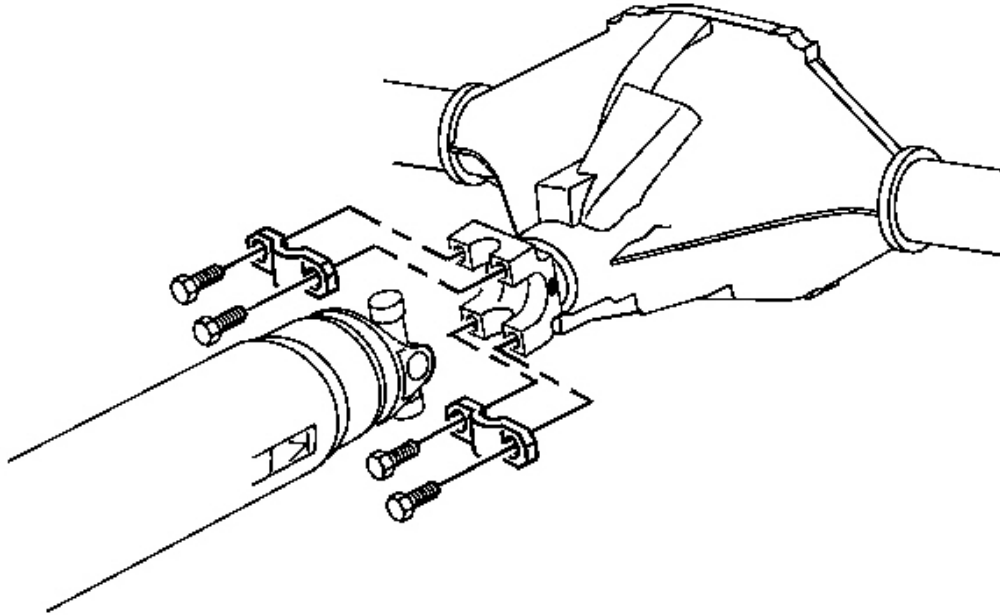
View Of Propeller Shaft, Retaining Bolts & Clamps
